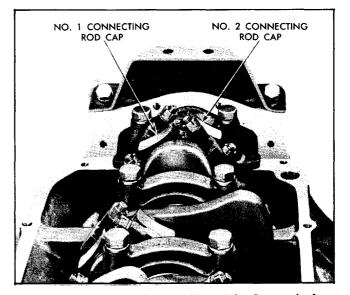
Crankshaft Positioned for Removal of No. 1 and 2 Connecting Rod Caps
